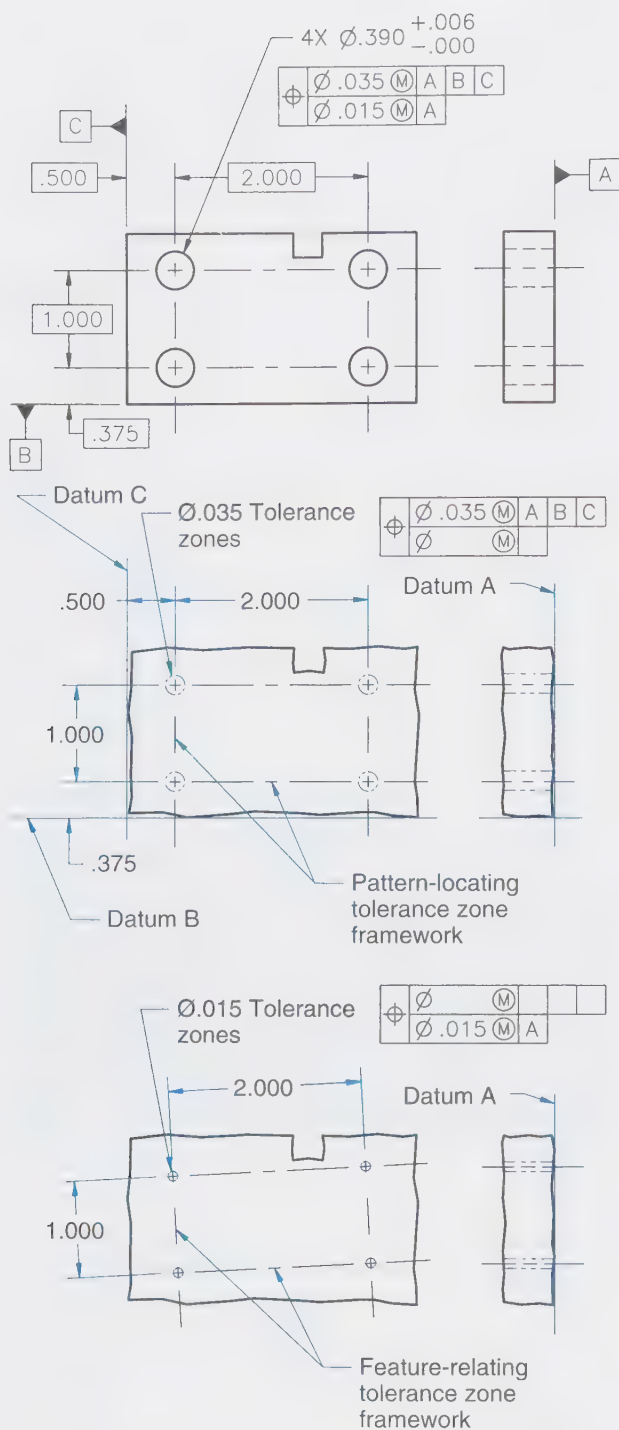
shows a simple plate with four holes in it. A composite position tolerance is applied to the four-hole pattern. The first segment specifies a .035” diameter pattern-locating tolerance. The second segment specifies a .015” diameter feature-relating tolerance.
